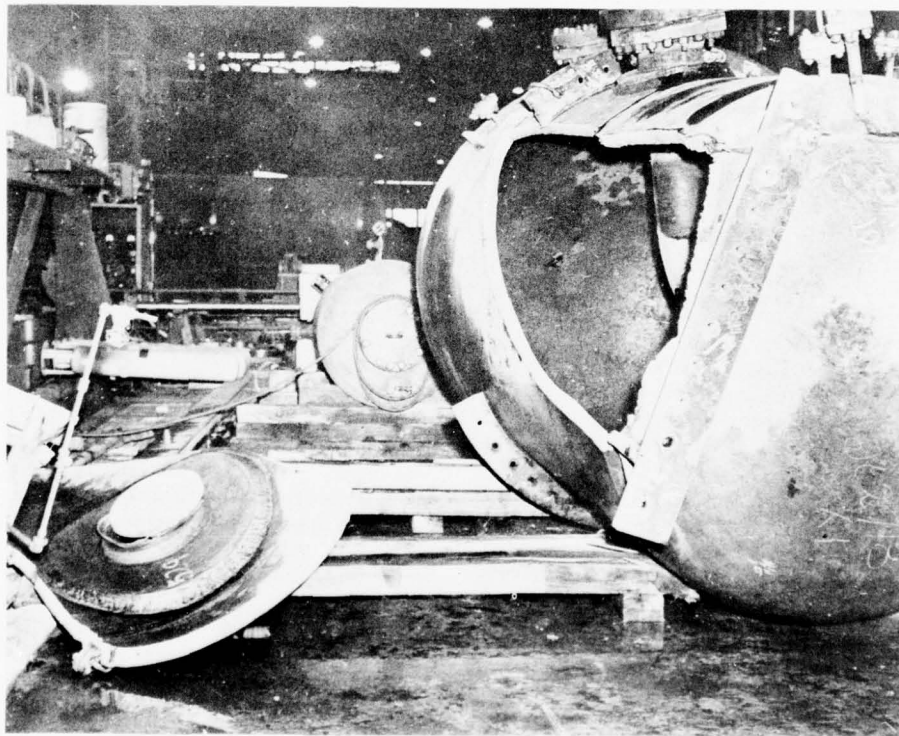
Hydrotest failure of A302-B pressure vessel (1954) (section size 3.0 in.; 75 mm).
